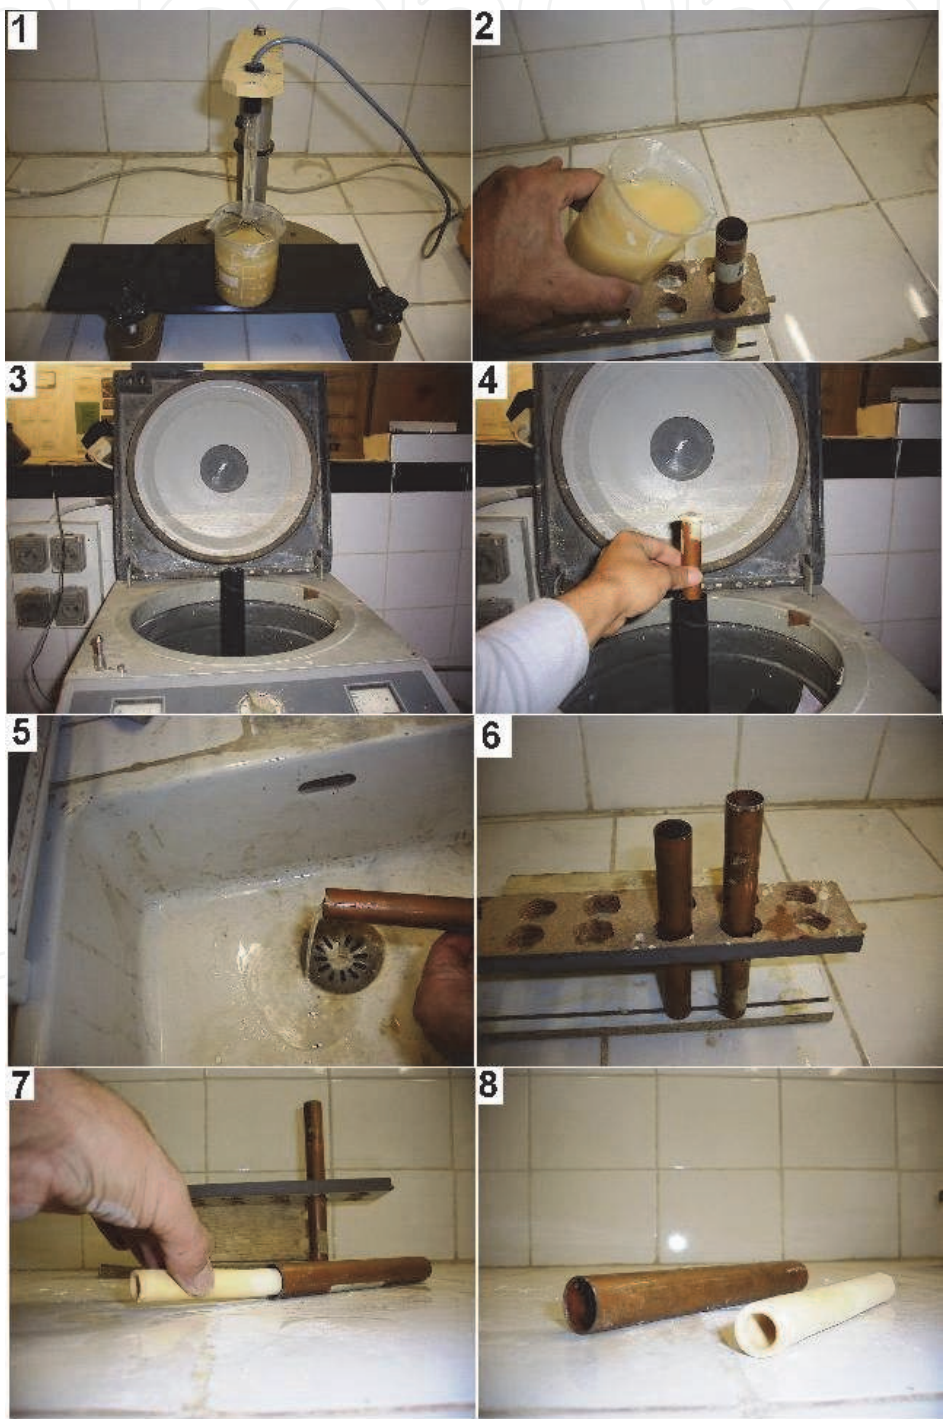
Steps order of membrane supports fabrication using centrifugal casting technique.
